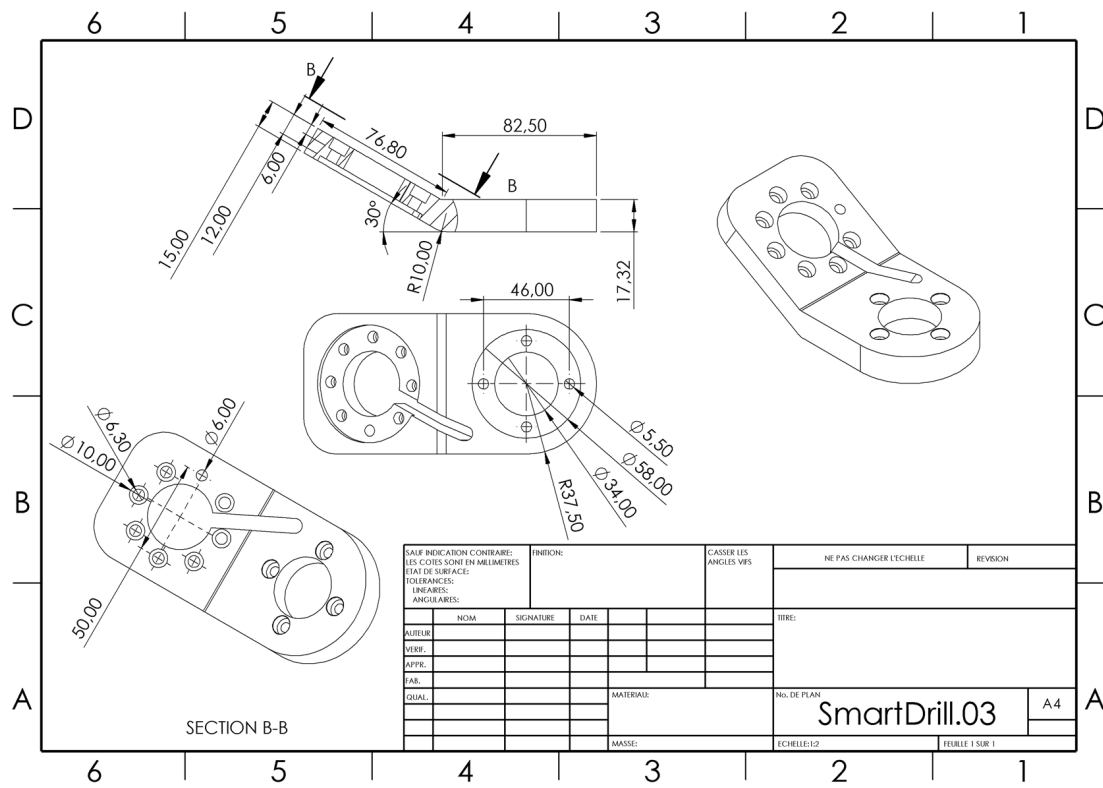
Attachment piece to the KUKA robot's flange.
